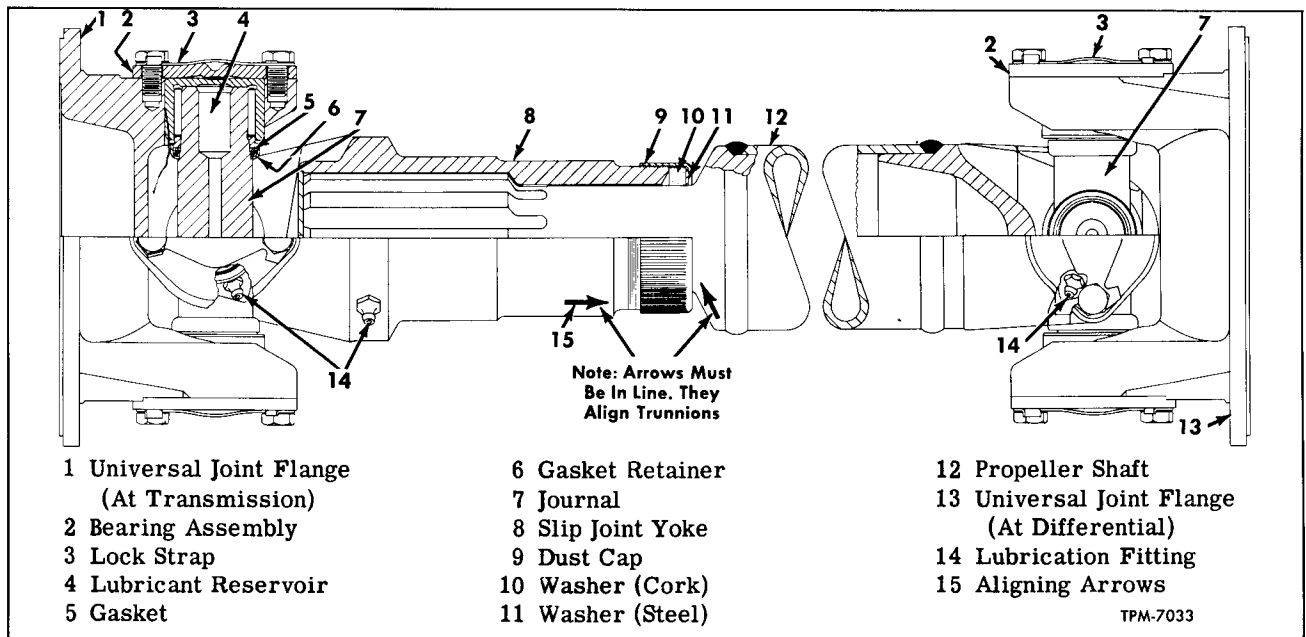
Cross Section of Propeller Shaft Assembly (Typical)
